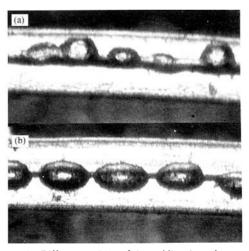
Different position of the welding drops because of using different welding wheels
